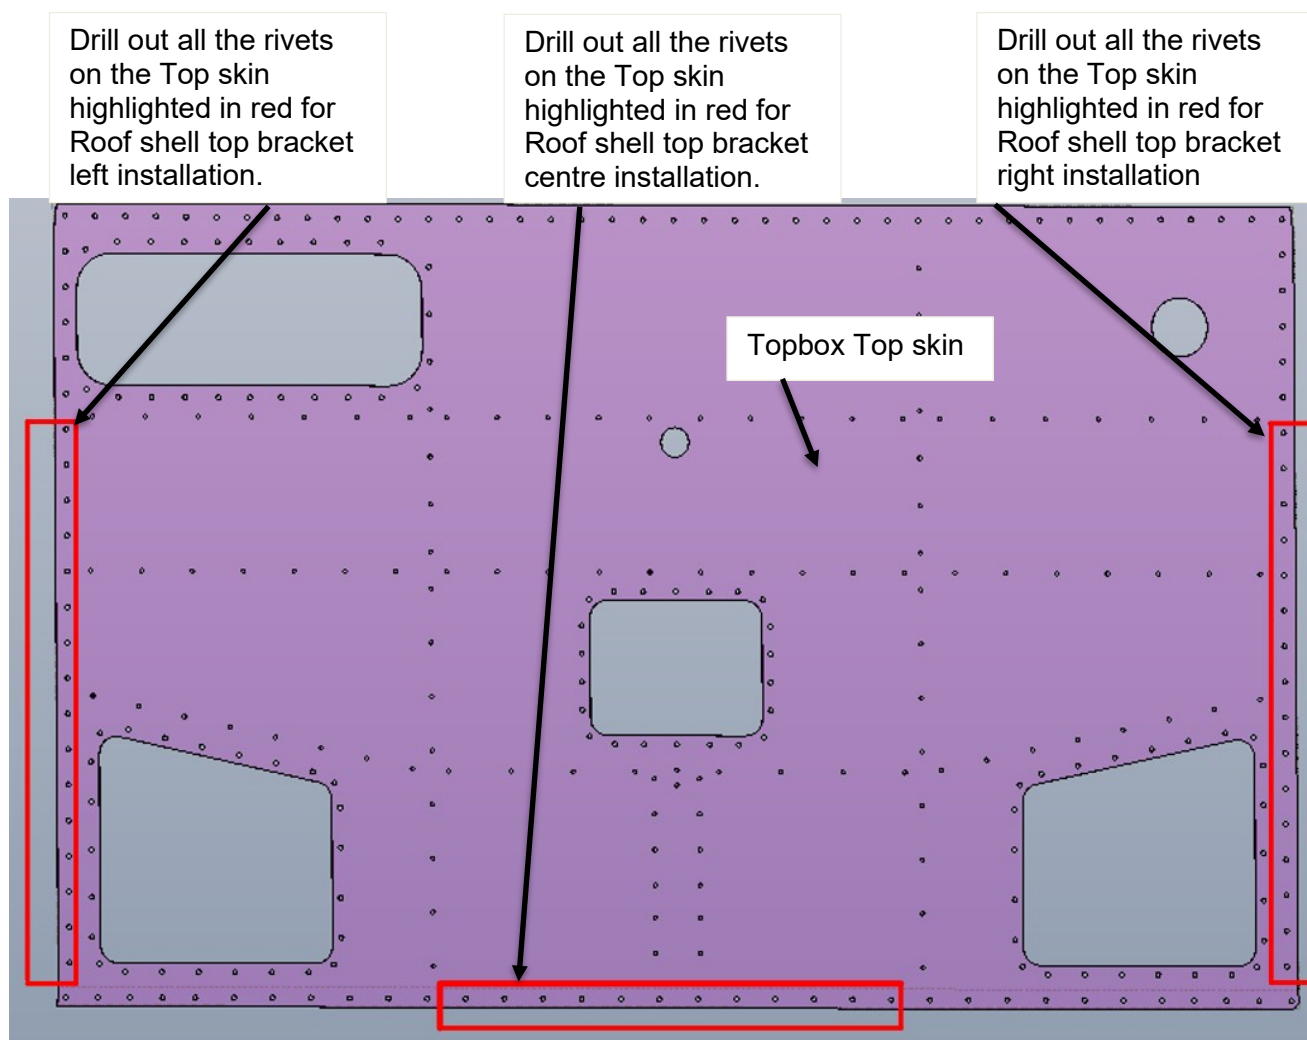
Drill out the rivets on top of the Topbox aluminium skin to install the brackets as shown.
